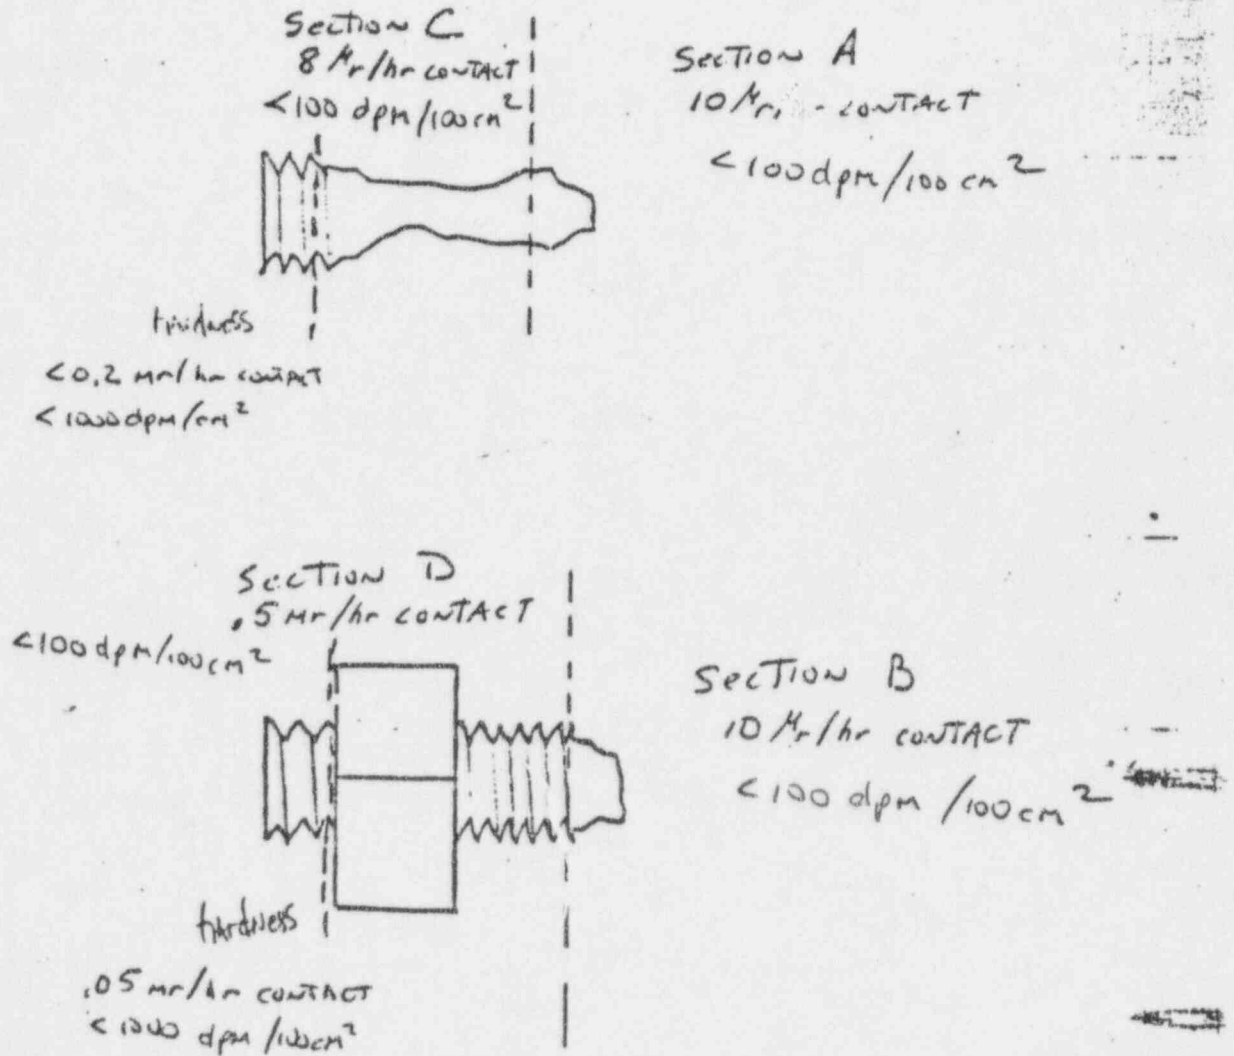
BNL Drawing of TMI Stud pieces showing cuts for hardness test and SEM samples.
